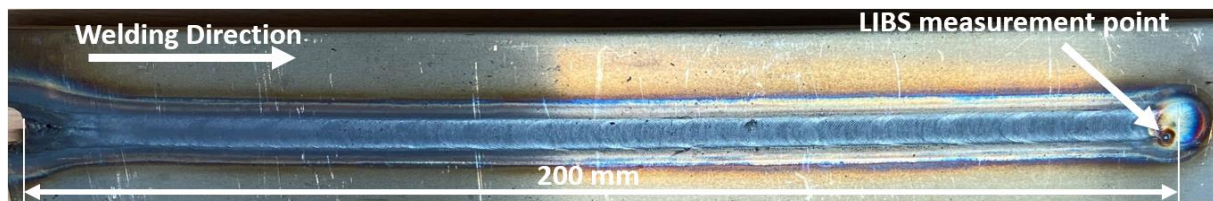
Finished weld seam of the Sample 1, LIBS measurement spot on the weld end crater is marked.
